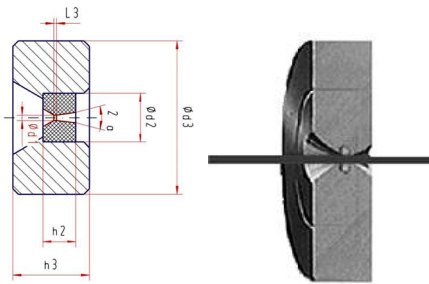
Geometry of the drawing tool. The smallest diameter is $d_1 = 350 \mu\text{m}$.
